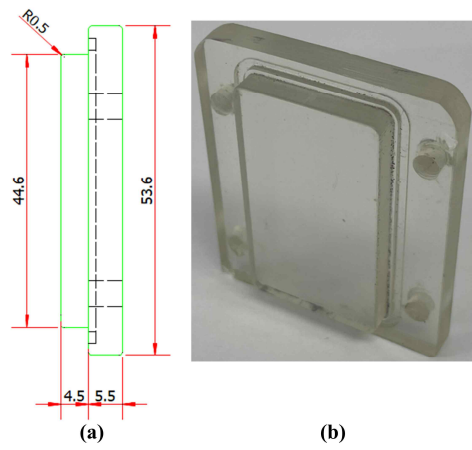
Polycarbonate radar cover: (a) mechanical drawings and (b) picture
